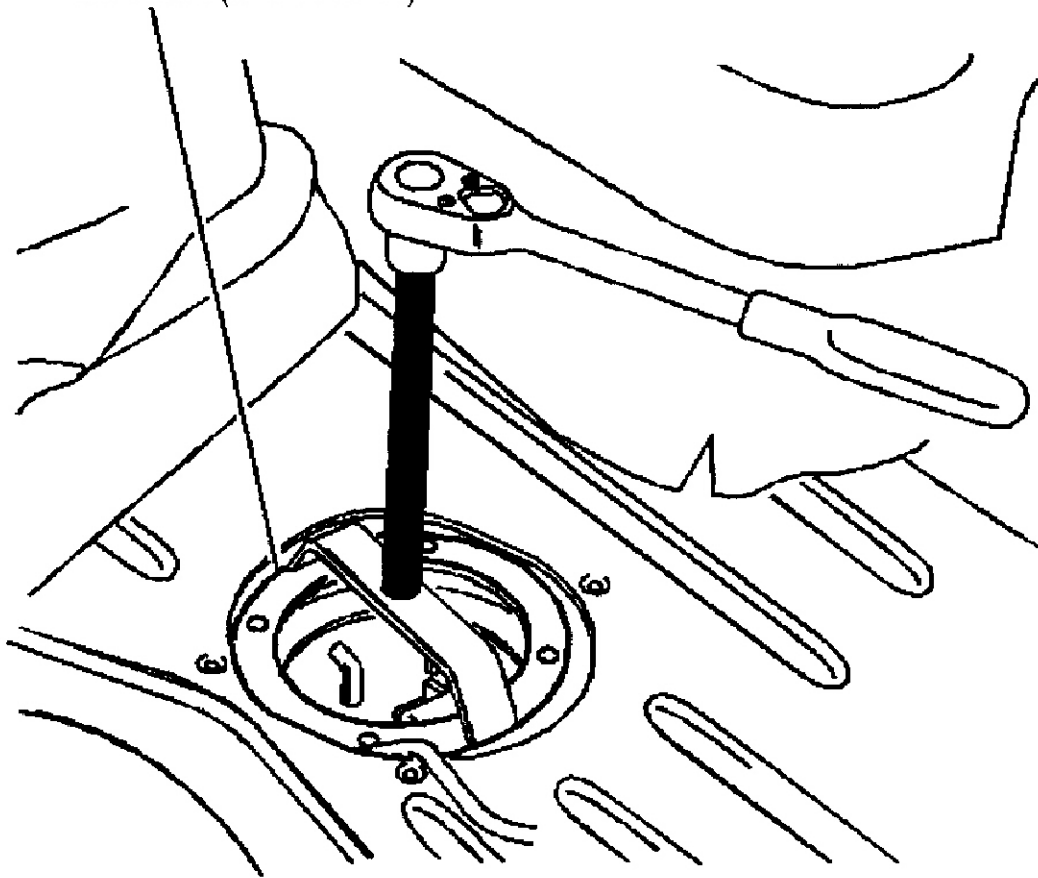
Removing/Installing Fuel Sender Assembly Components (Catera - 3.0L)
